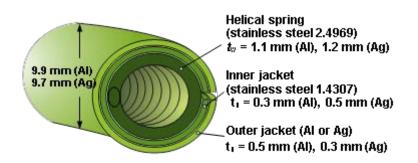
Cross sectional view of a Helicoflex[®] metal seal [1]
